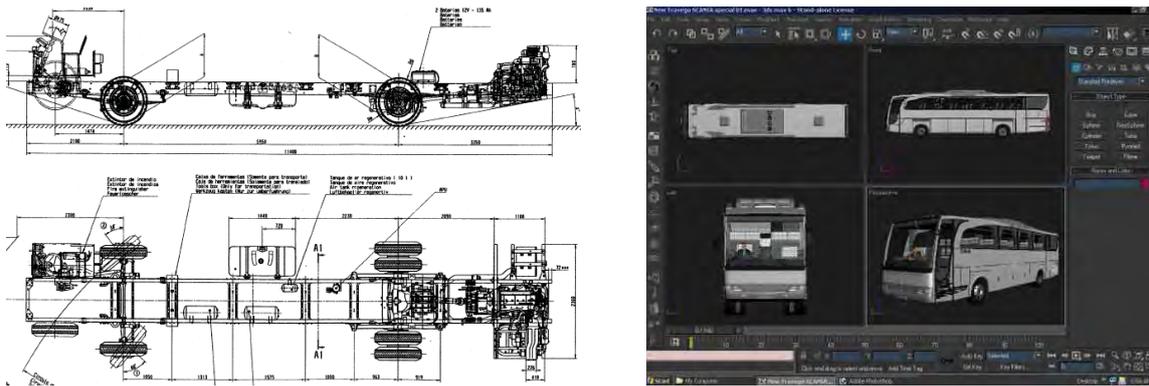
Typical bus chassis frame available from authorized distributor(left) and drawings of bus exterior (right)
